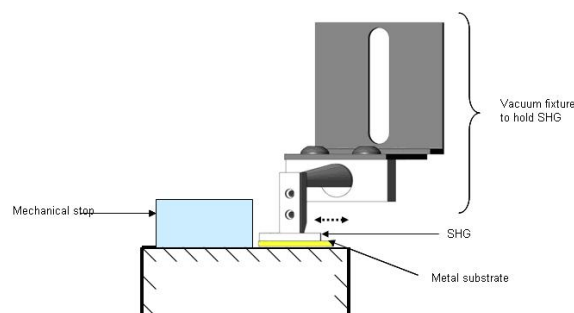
SHG Assembly using Vacuum Fixture figure shows that the SHG is held with just enough vacuum required to hold the SHG at required angle. The objective is to align the SHG front facet with the front facet of the metal substrate on to which it is attached. The SHG that is being held with vacuum will "slip" back when it touches the mechanical stop if the force applied on the chip as it contacts the "stop" surface is greater than a set value. This results in very precise alignment of SHG with the metal substrate. Once the SHG is aligned, it will be attached to the metal substrate using UV cured glue or soldered if possible. Such variations based on the general concept disclosed here can be useful for a number of precision alignment applications.
